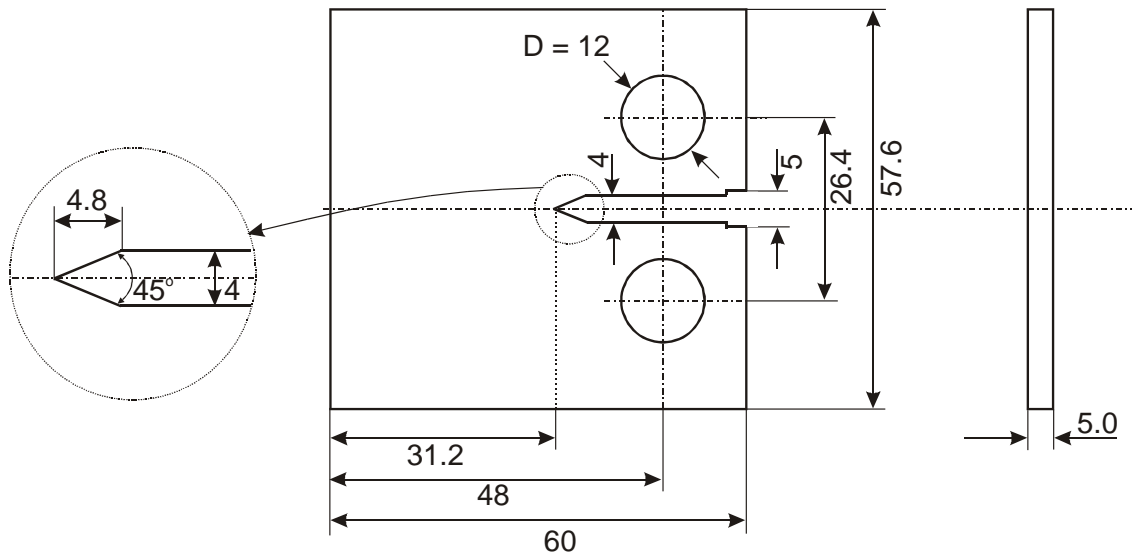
Mold geometry for fracture toughness according to specification ASTM D5045.
